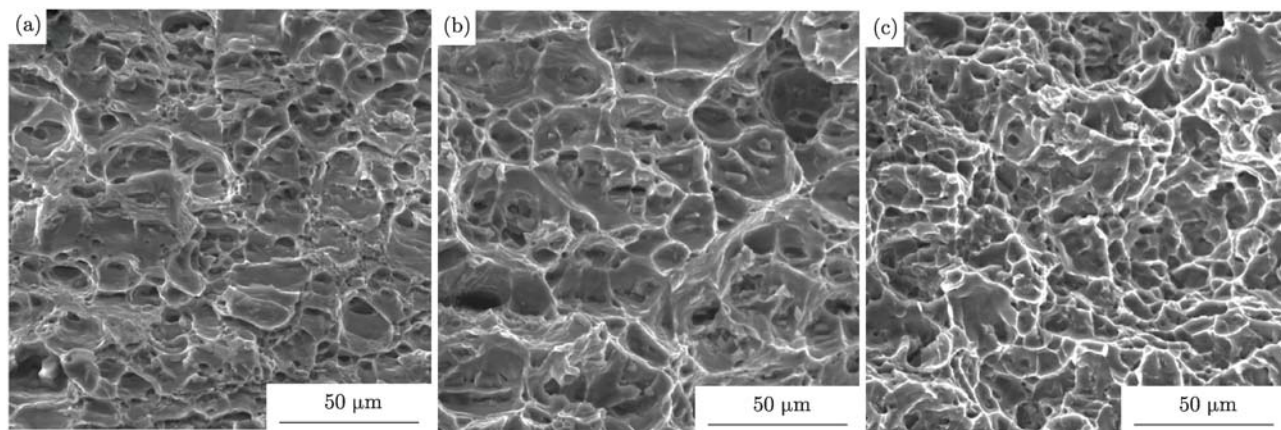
Typical tensile fracture surfaces of the BM and the TIG-welded joints at the heat input of 270 J/mm: (a) BM; (b) as-welded; (c) post-welded aging.
